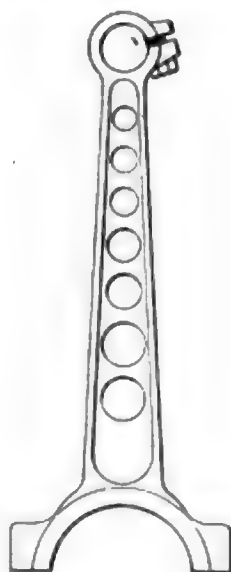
The connecting rod has been lightened by dressing with file and drilling holes through inside web
